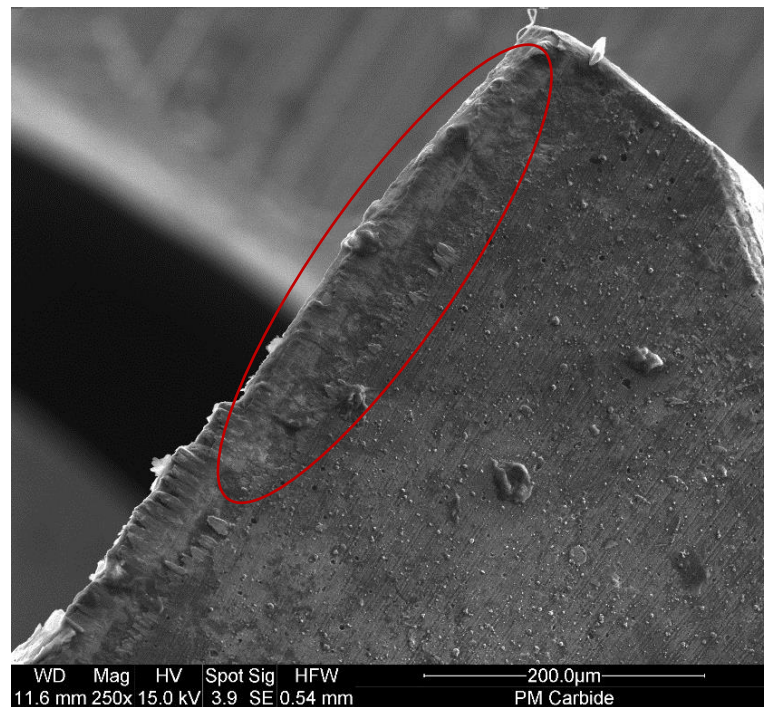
250x SEM top down view of the cutting edge of the carbide drill bit after drilling 60 holes in PM titanium.
